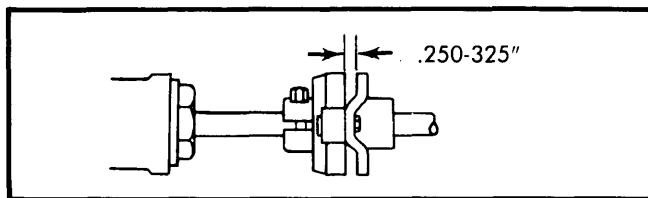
Adjusting Flexible Coupling for All General Motors Models
